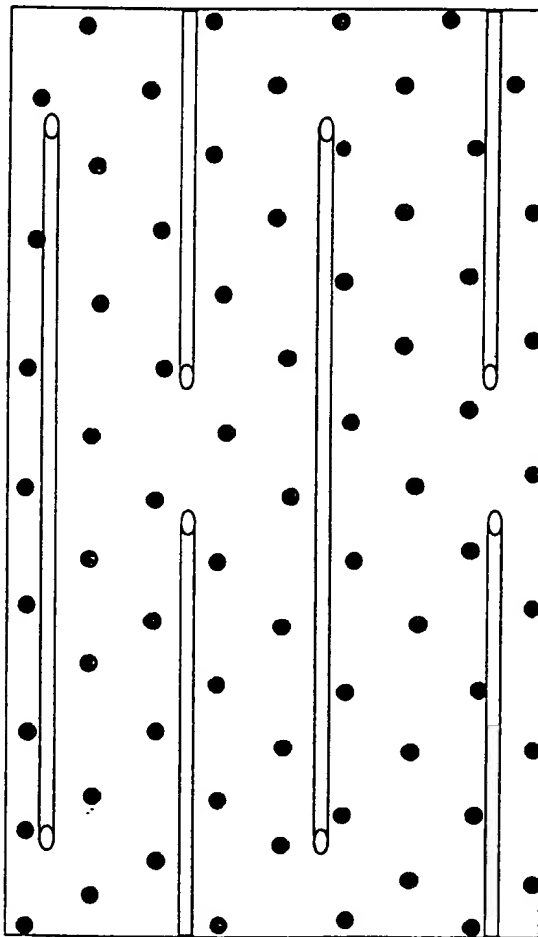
Schematic layout of blank tubes attached to the inside of the perforated shroud (before it is rolled up and welded).
